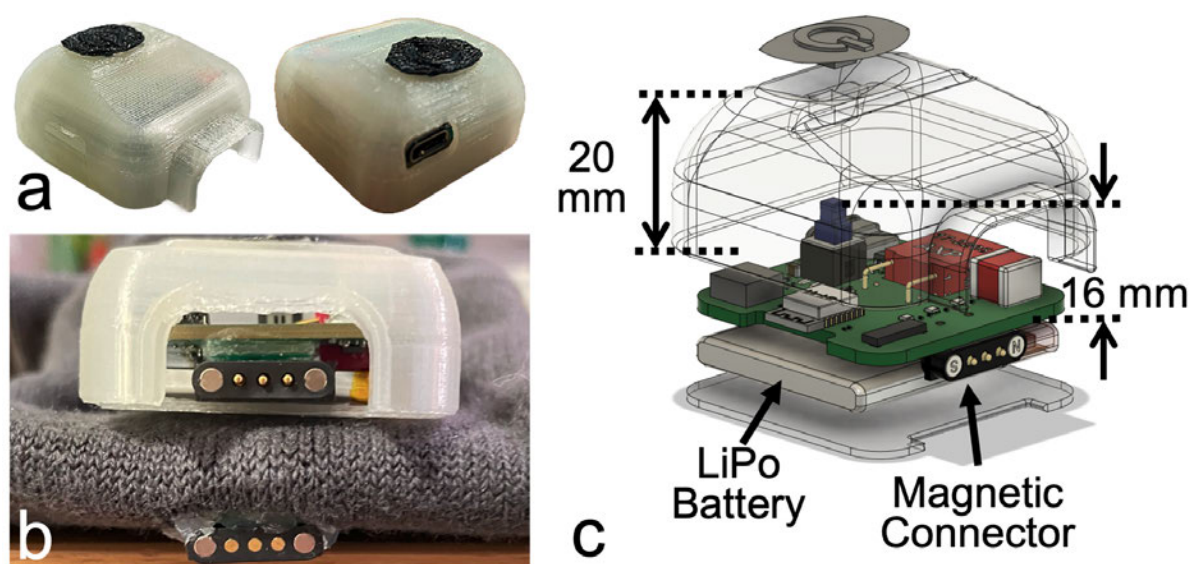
(a) Isometric views of the custom 3D-printed enclosure, demonstrating different perspectives of the housing with flexible press button on the top and USB-C charging port on the back side; (b) Front view of the enclosure showing the alignment of a pair of magnetic connectors; (c) Overview of the enclosure with annotated dimensions, indicating the internal placement of the LiPo battery and magnetic connector.
